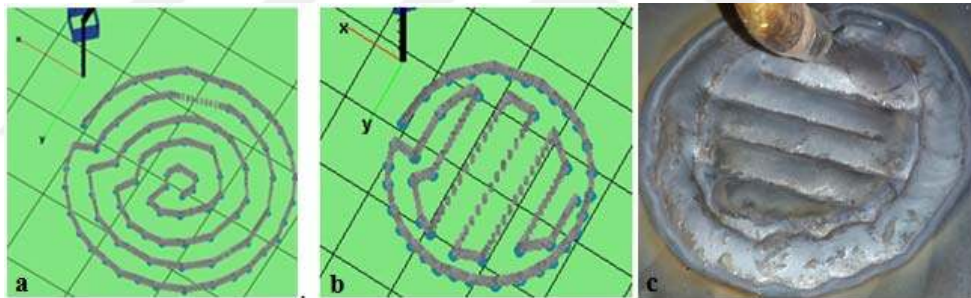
22. Combined path pattern for solid filling cylindrical part, (a) CAD drawing of the combined path pattern by spiral strategy; (b) CAD drawing of the combined path pattern by zigzag/raster strategy; and (c) the first deposited layers using the zigzag/raste
